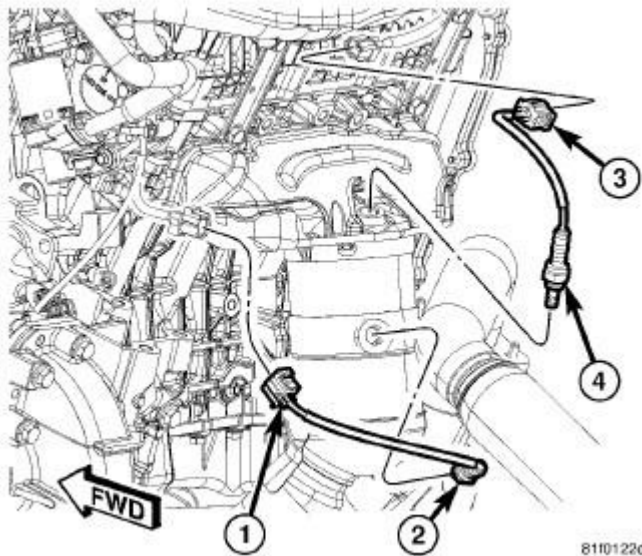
Right Maniverter Downstream/Upstream Oxygen Sensors
